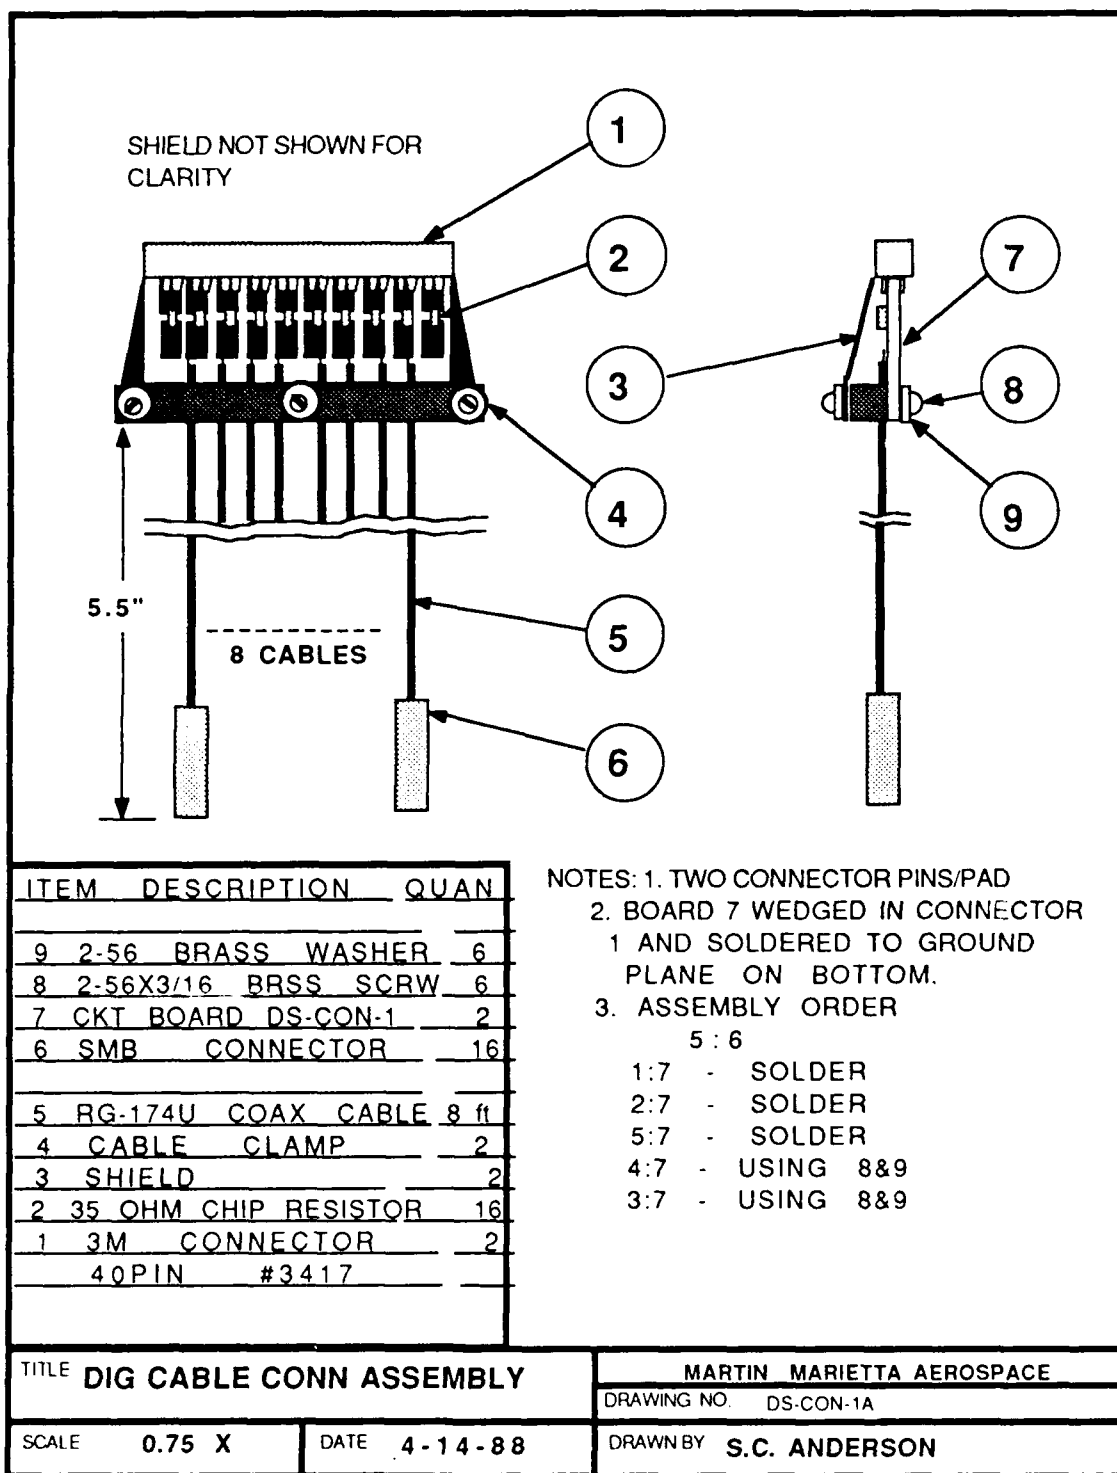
Connector and Cable Assembly Shop Drawing
